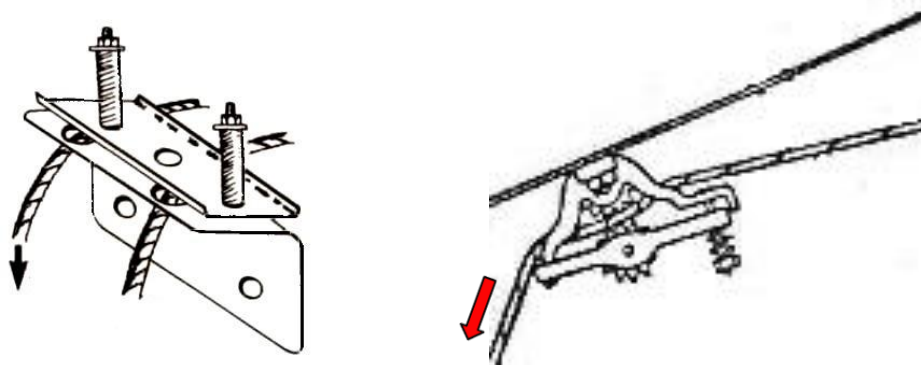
Alternative designs of twine tensioner - Spring-loaded plate-type (left) and spring-loaded intermeshing (free-turning) gear-type (right)
